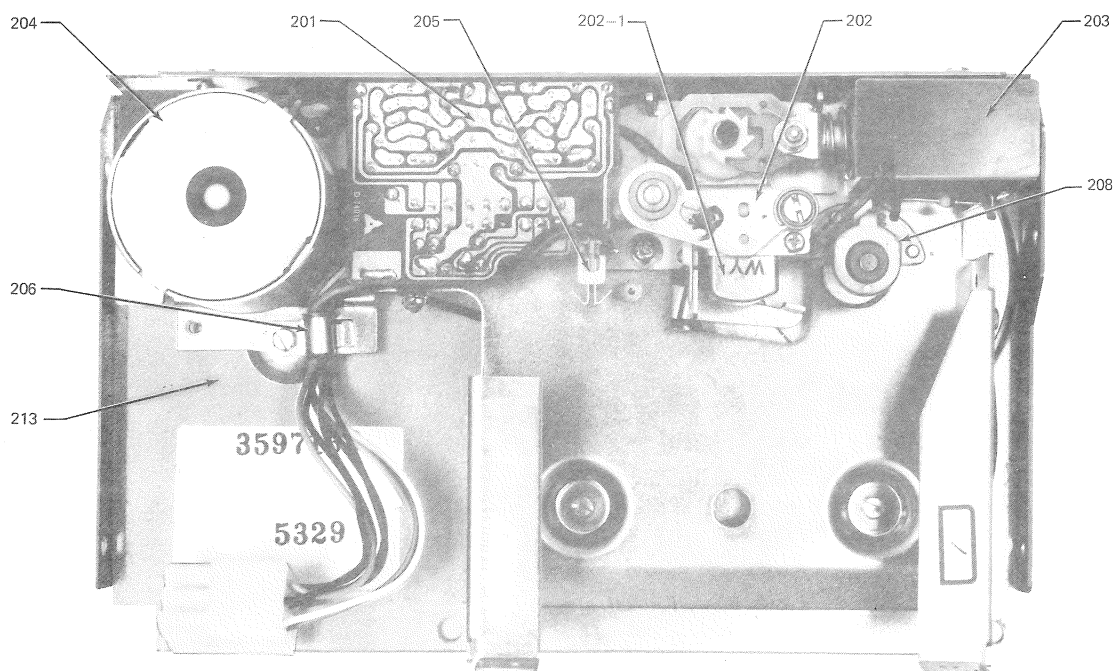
PARTS LOCATION, TAPE DECK ASSEMBLY
